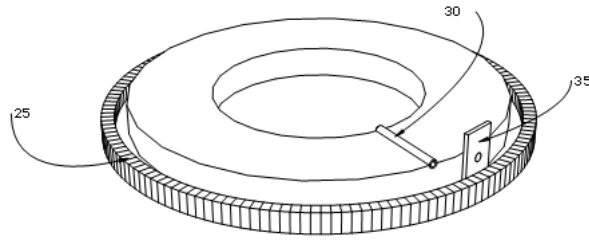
Cutaway drawing of Rielles Drive 3.0
